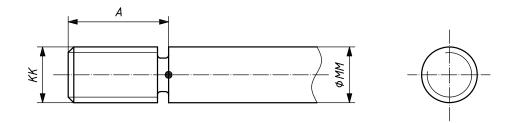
Male thread without shoulder for hydraulic cylinder piston rods
